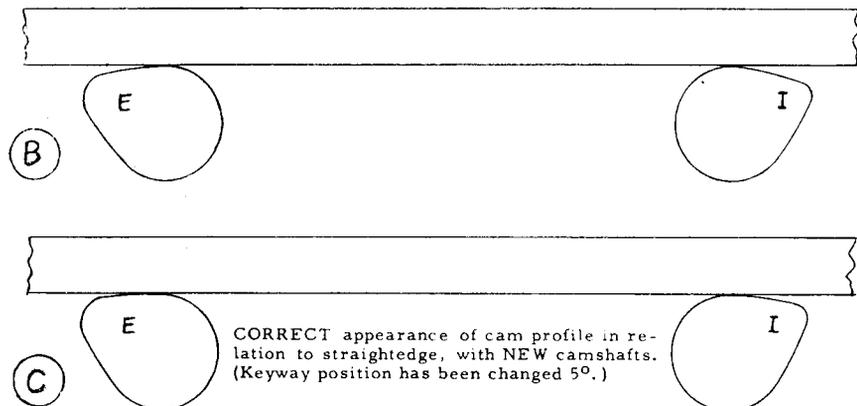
View B shows next to latest valve camshaft setup. Other view shows latest camshafts. Note relationship to straightedge.
